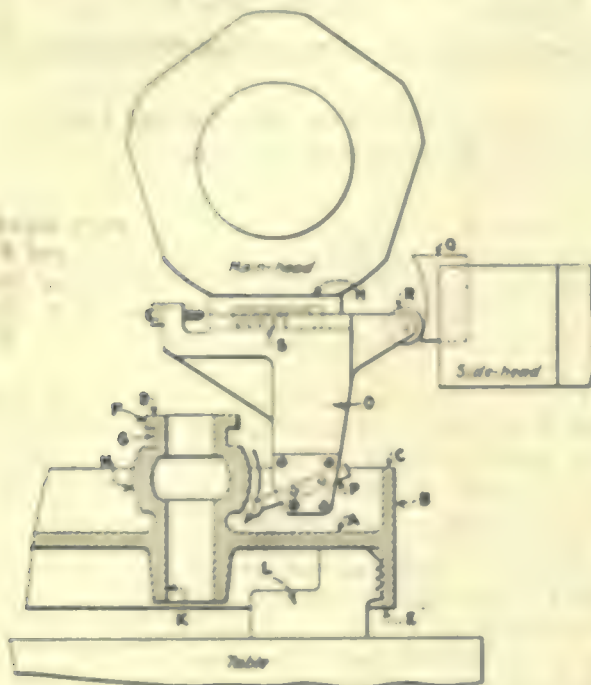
SPHERICAL TURNING ATTACHMENT FOR VERTICAL TURRET LATHE
